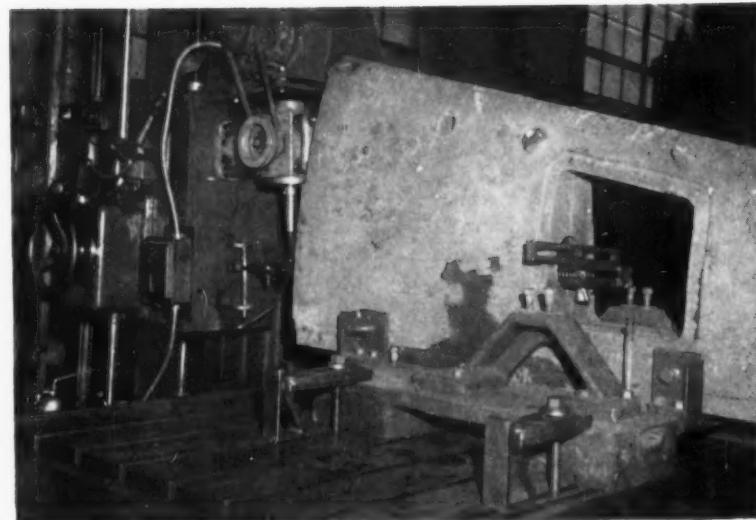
This setup for cutting the tight-tolerance, interchangeable keyways permits intermittent production. Work can be removed from machine, continued later without affecting accuracy.
